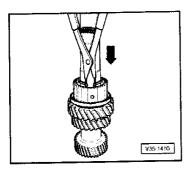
> Determining thickness of circlip for synchro-hub for 1st and 2nd gear
